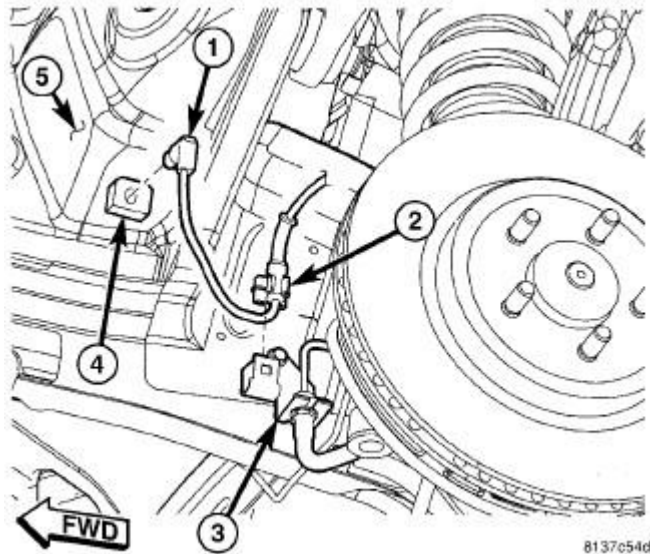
WHEEL SPEED SENSOR AT BODY CONNECTOR
